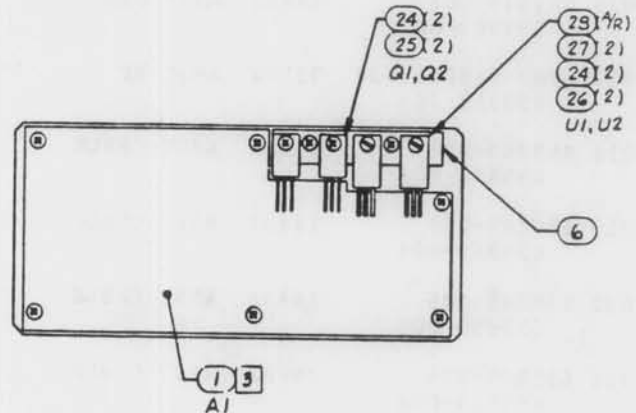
1.0 to 12.4 GHz Front End A7 Parts List, Part No. 660124 (Sheet 1 of 3)
